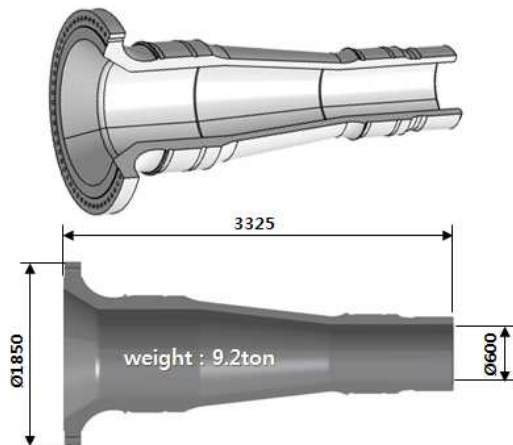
Final machined 3MW class hollow main shaft shape and dimension
